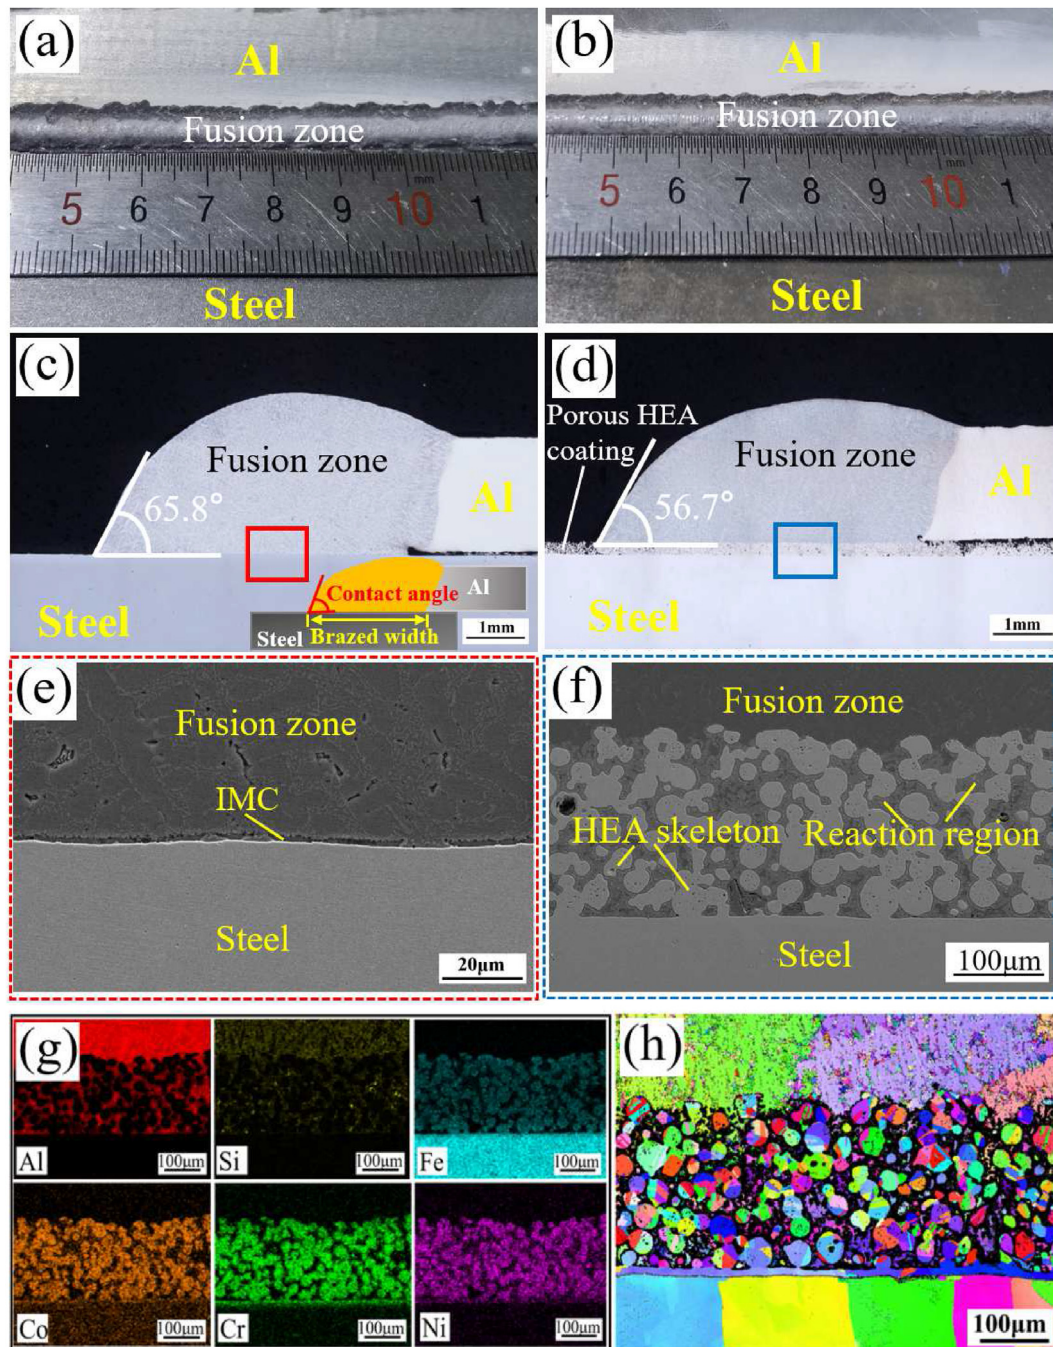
(a) Weld appearances of laser Al/uncoated steel joints, (b) weld appearances of laser Al/porous-coated steel joints, (c) cross-sectional of laser Al/uncoated steel joints, (d) cross-sectional of laser Al/porous-coated steel joints, (e) enlarged view at the interface of the red box in (c), (f) enlarged view at the interface of the blue box in (d), (g) EDS mapping in (f), (h) EBSD analysis in (f).
